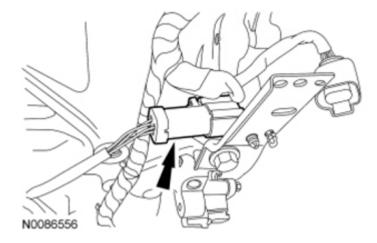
Locating Crankshaft Position Sensor Electrical Connector Courtesy of FORD MOTOR CO.
